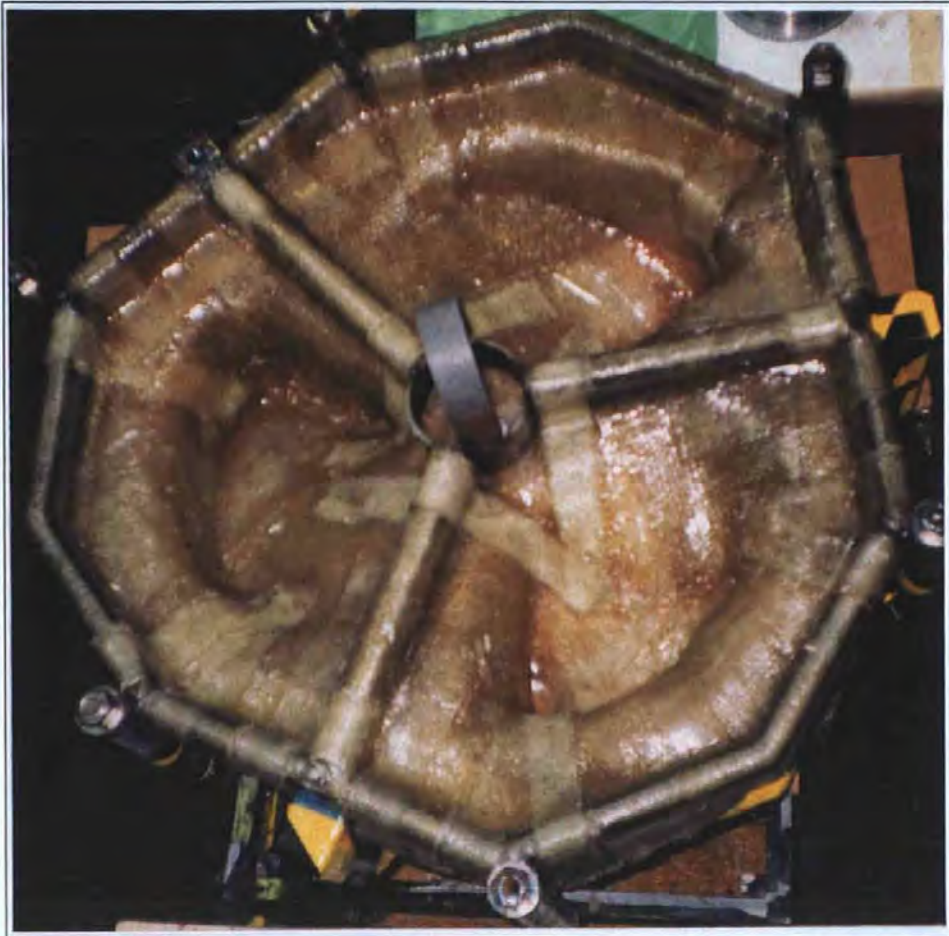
The mould for the propeller for the vessel "Aquatay" showing the deep cavity.
